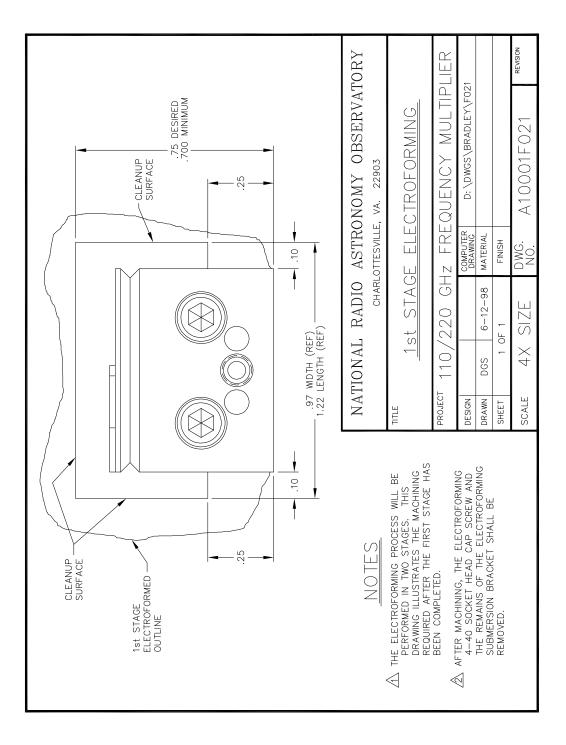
110/220 GHz frequency doubler: Details of the machining needed after completion of the first stage of electroforming.
